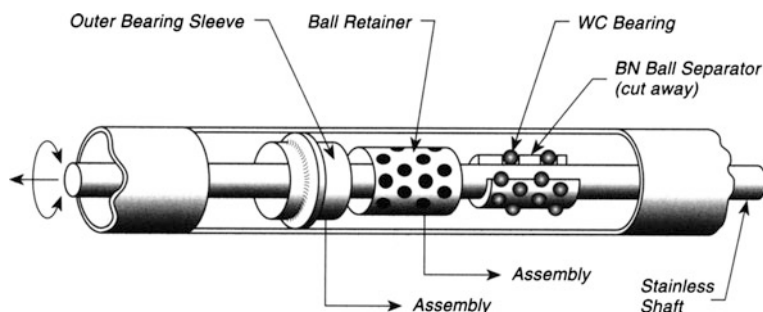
Exploded view—self-lubricating translation-rotation bearing
